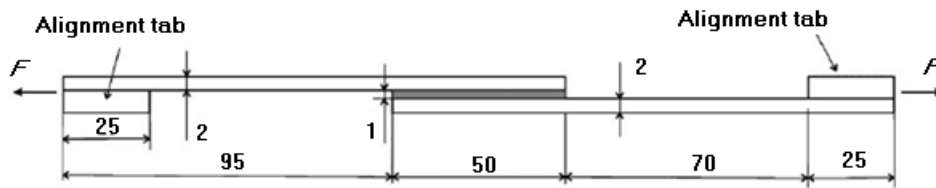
Geometry of the SLJ test specimens (dimensions in mm).
